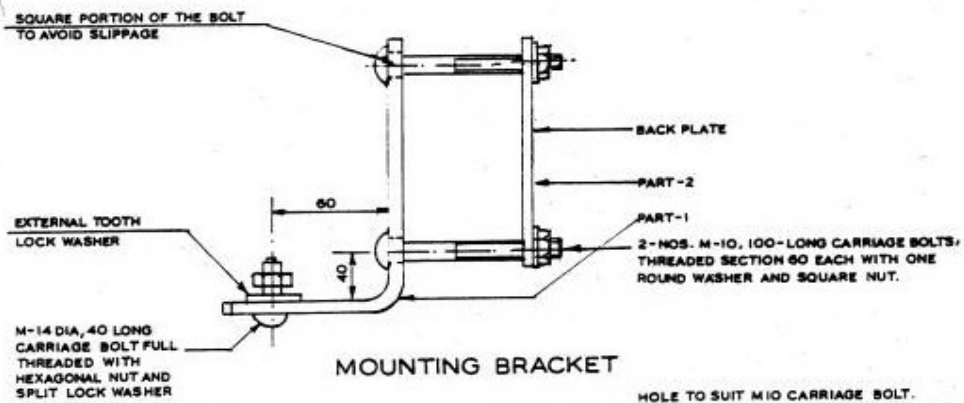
MOUNTING DETAILS OF 11KV FUSE CUTOUT
